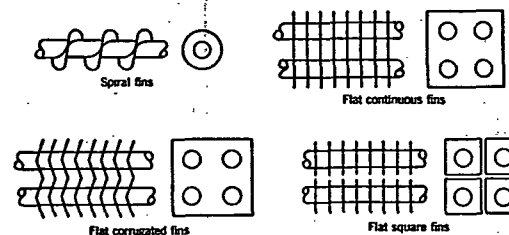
TYPES OF FIN COIL ARRANGEMENT
